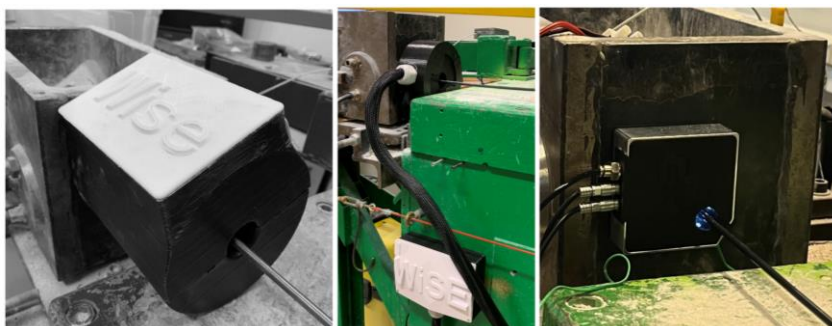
Three prototypes of WiSE process monitoring system for the wire drawing process.
